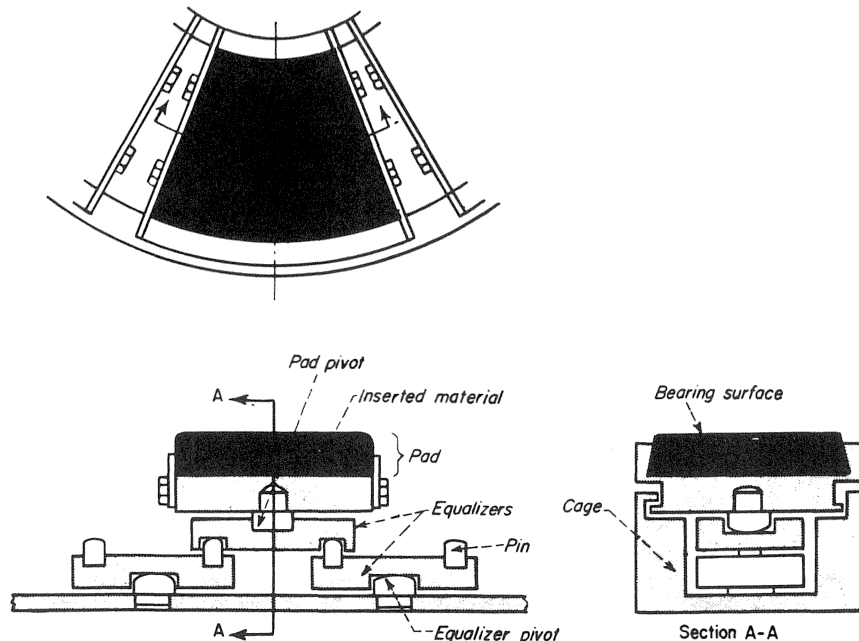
Water Lubricated Tilting-Pad Thrust Bearing with Sensitive Equalizing System, and Graphitar Inserts in Each Pad.
